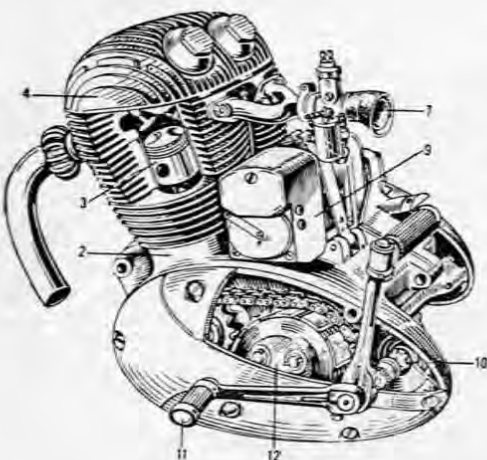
Sectional view of the Jawa OHC 500 cu. cm motor-cycle engine.
